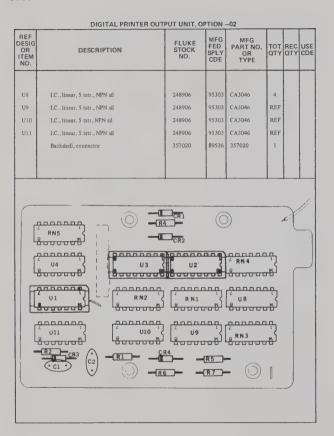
DPOU PCB ASSEMBLY, OPTION -02
